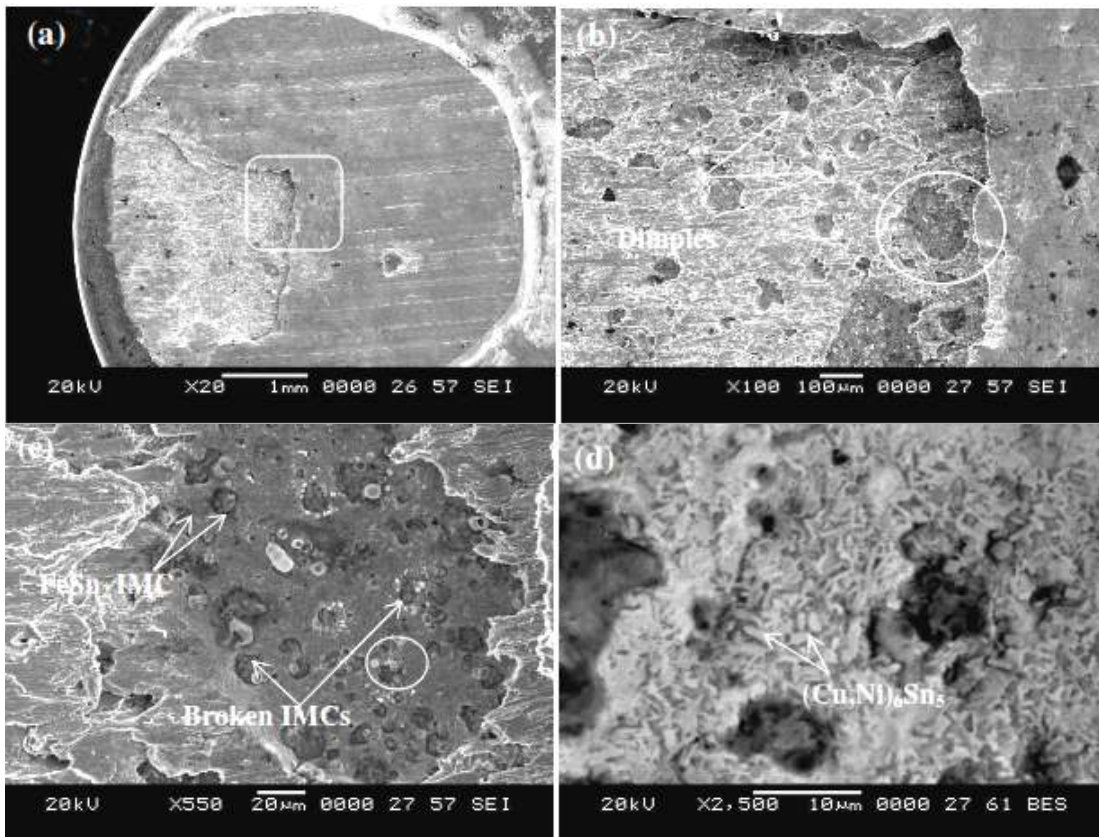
SEM micrographs of the fractured surfaces of Sn-0.7Cu solder on mirror Fe-Ni substrate surface (a), (b) lower magnification (c), (d) higher magnification
